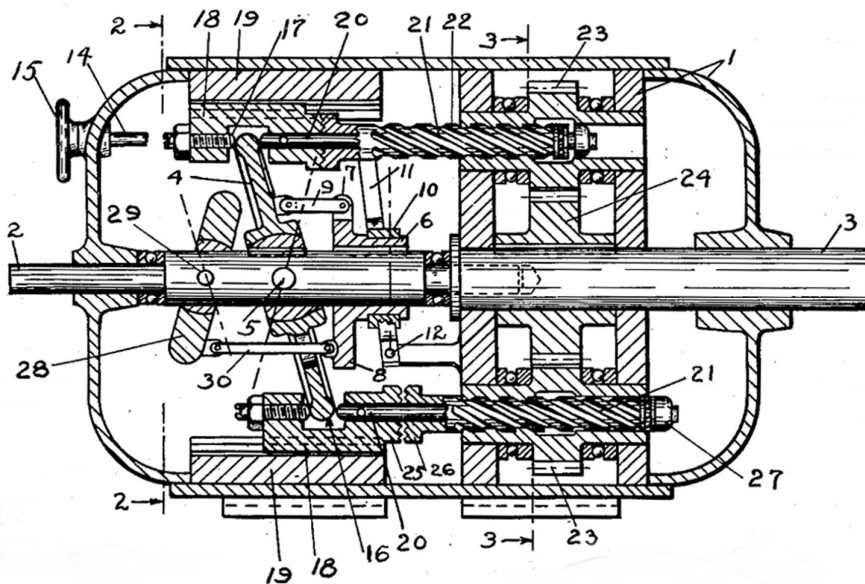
Swashplate pushing helix rods, which drive fixed planet gears
